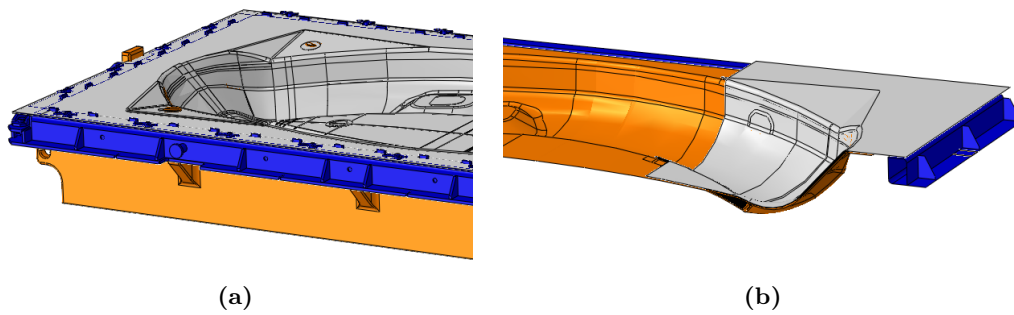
CAD views of the assembly with the frame, and the bottom mold and the formed part (a) 3D CAD and (b) shell based simplified assemblies
